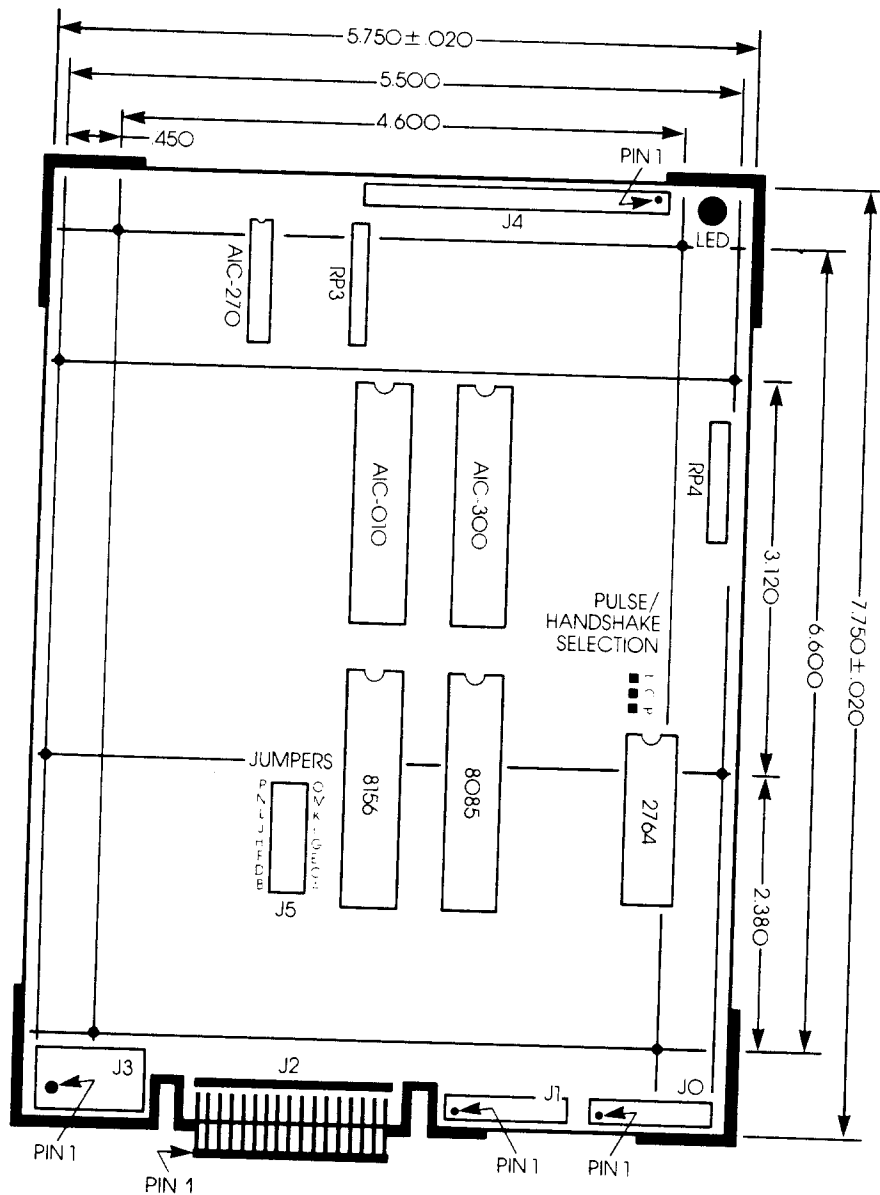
ACB-4070 BOARD LAYOUT
